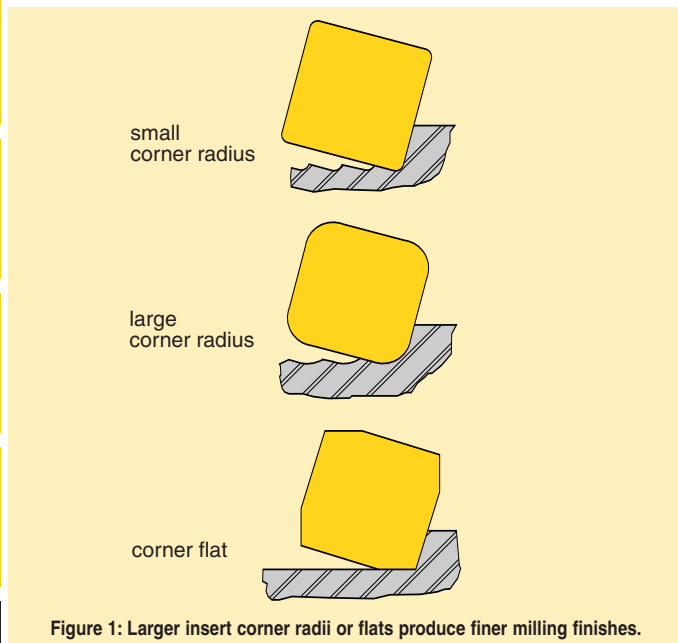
Larger insert corner radii or flats produce finer milling finishes.
